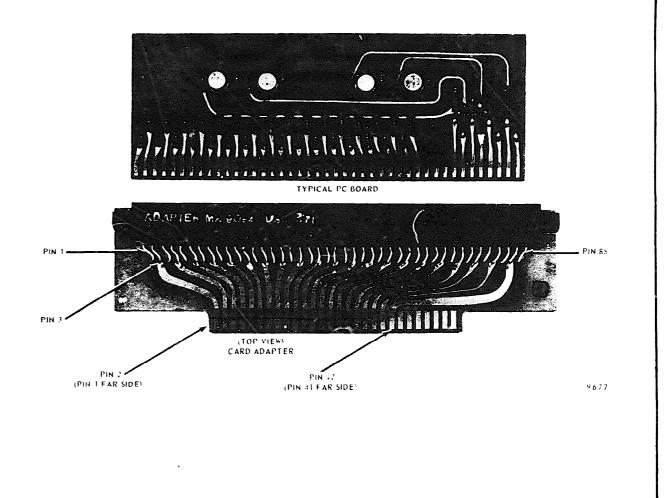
, Printed Circuit Card Adapter MX-9094/USM-371 43/86 Pin FGC
